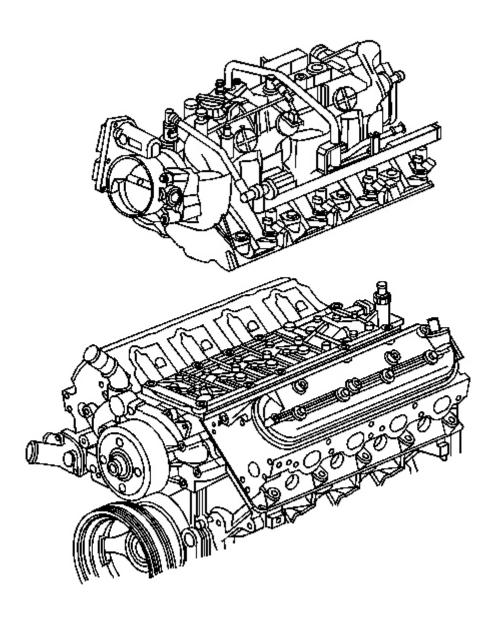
Intake Manifold Courtesy of GENERAL MOTORS CORP.
